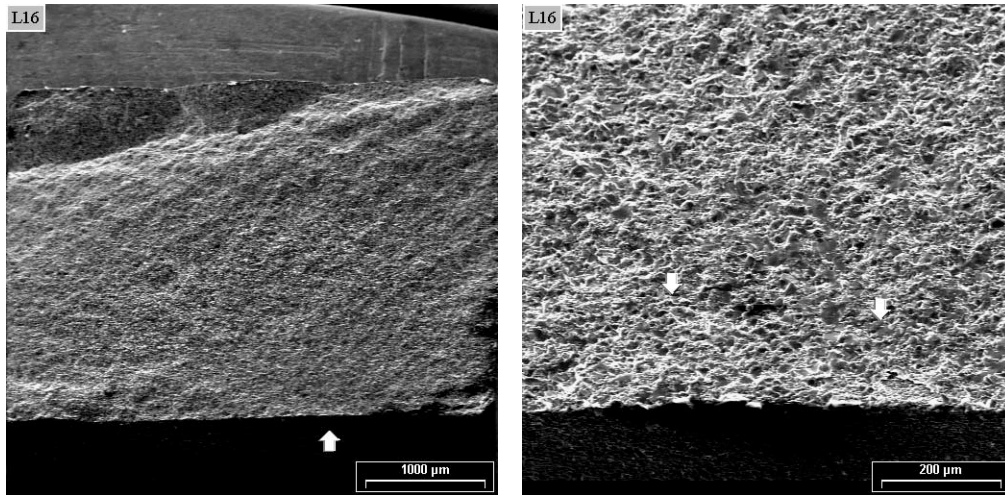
Fracture surface of a longitudinally-ground, chamfered, ASTM C1161B bend showing (left) failure location and (right) higher magnification image of the location containing the strength-limiting flaw.
